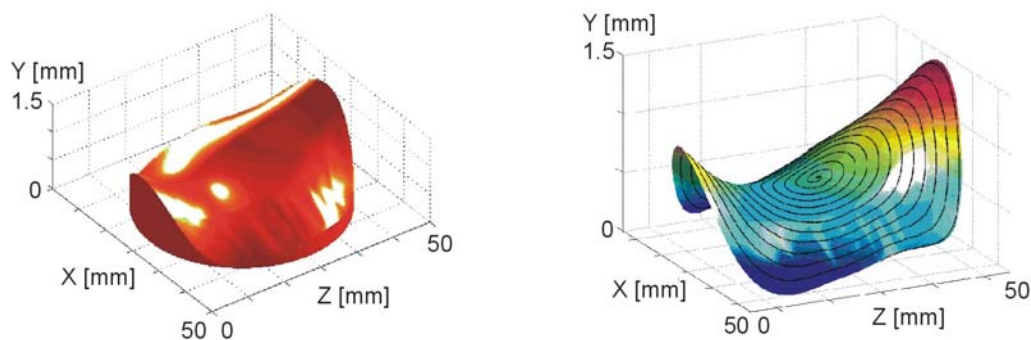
Free-form mirror surface (CAD simulation) and tool path with spiral infeed for ball-end milling.
